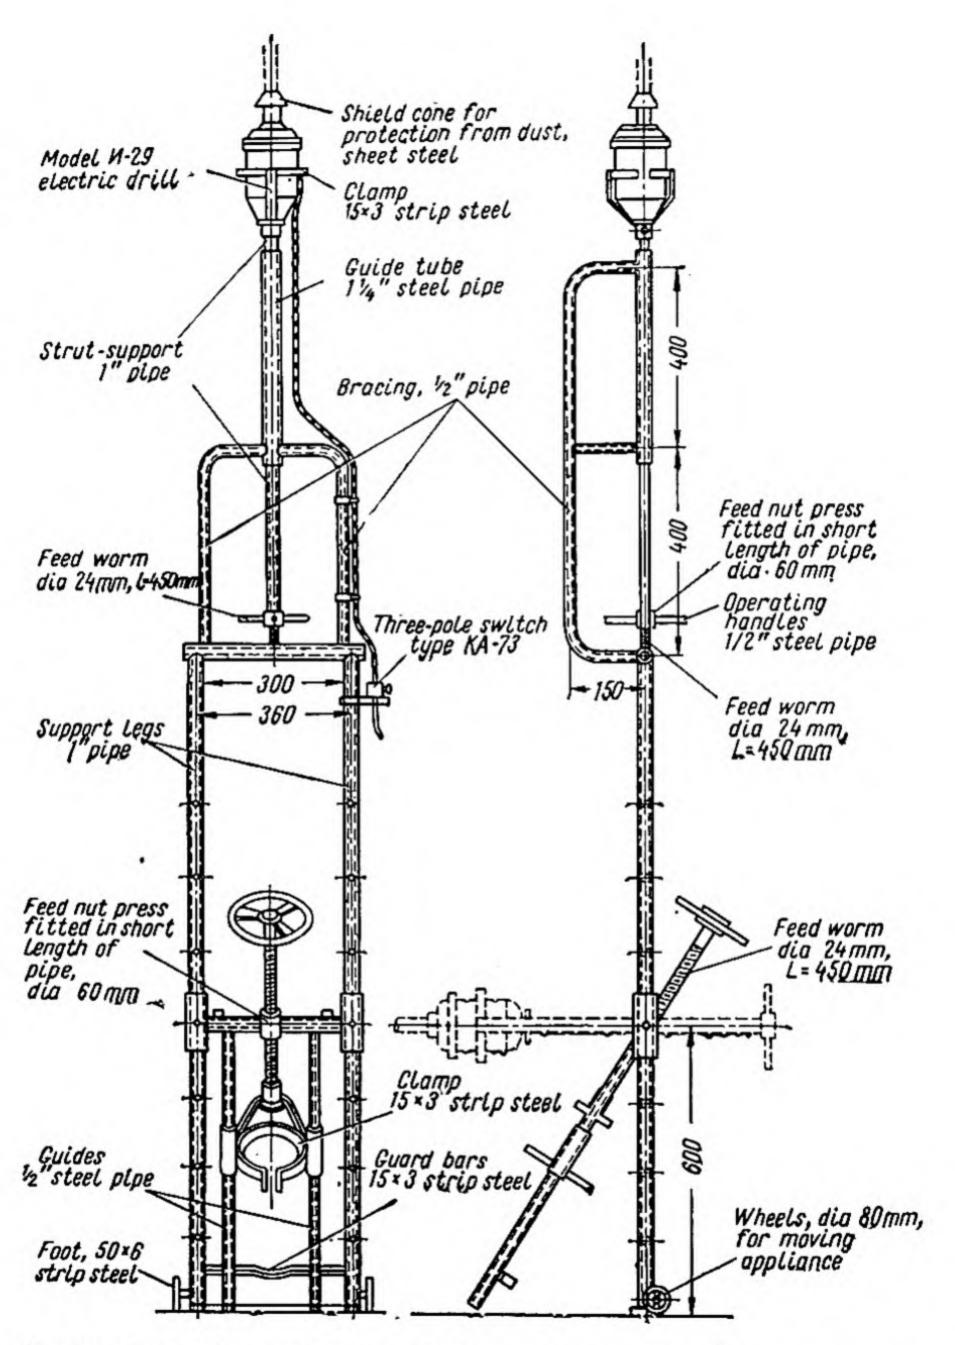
Support-leg appliance for drilling holes in walls and floor structures.
